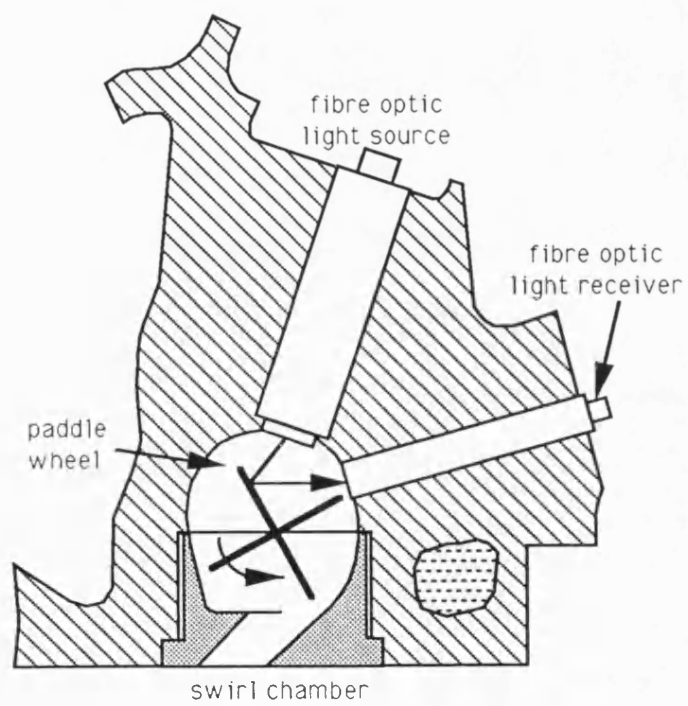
Paddle wheel anemometer installed in the swirl chamber
